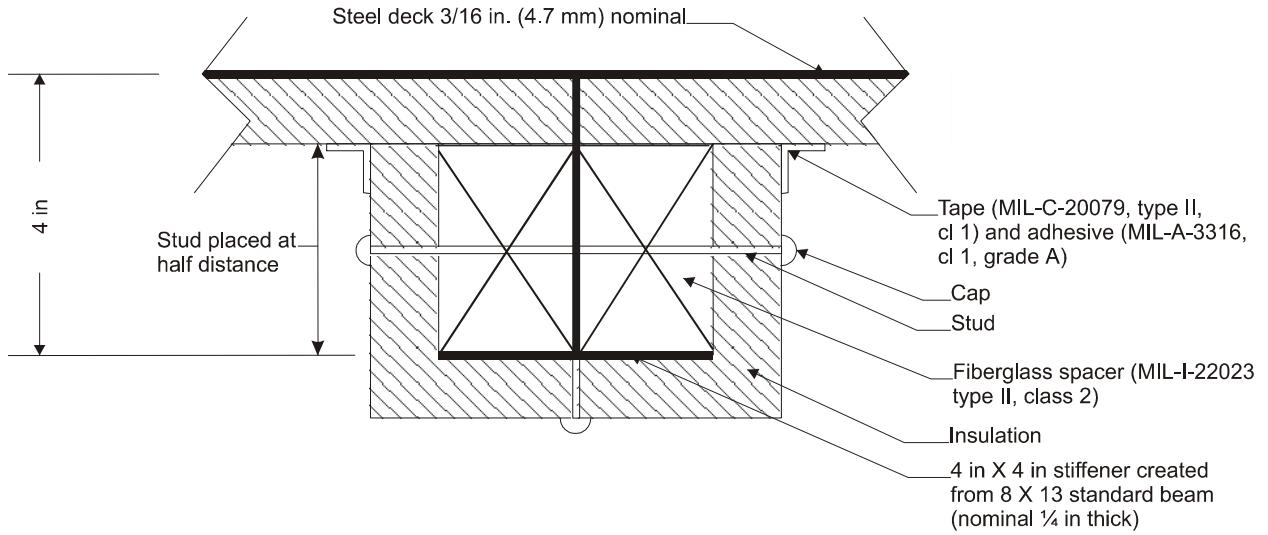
Detail A - insulation attachment on stiffeners (sectional view).
